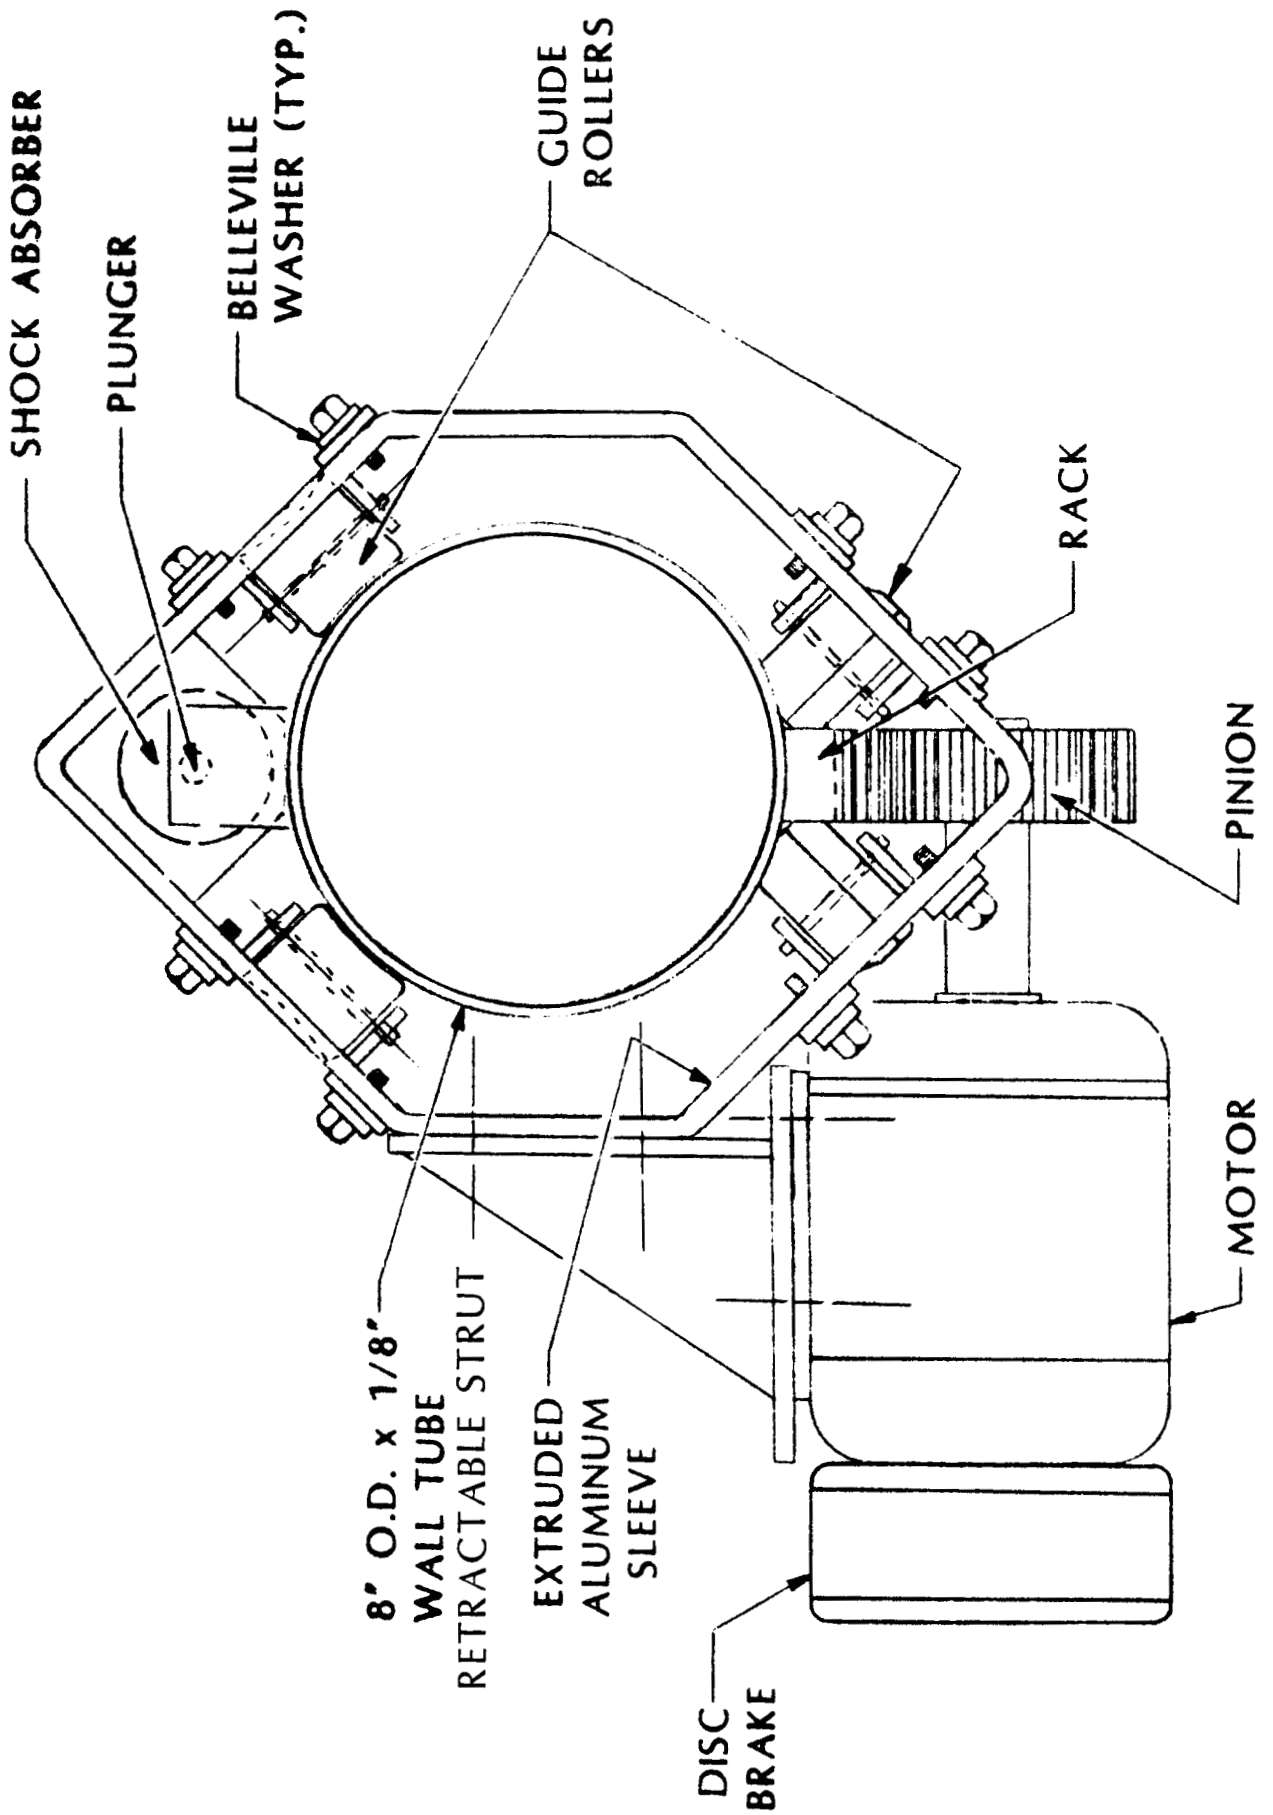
RETRACTABLE STRUT SLEEVE TOP VIEW
